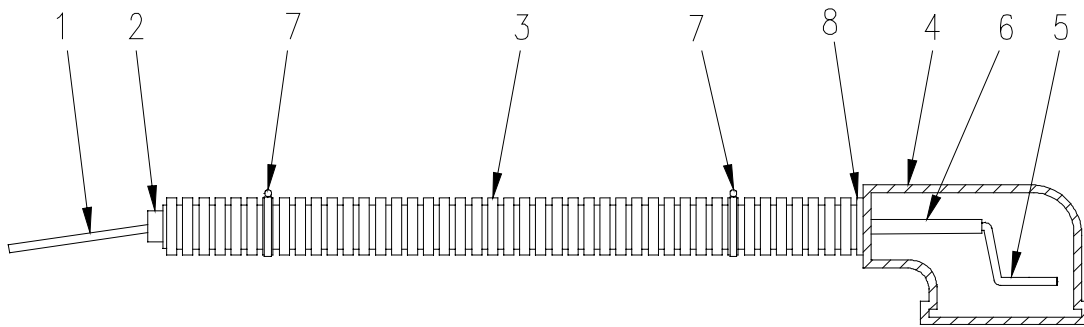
Preheater Lead Assembly (MEP-531A/501A)
